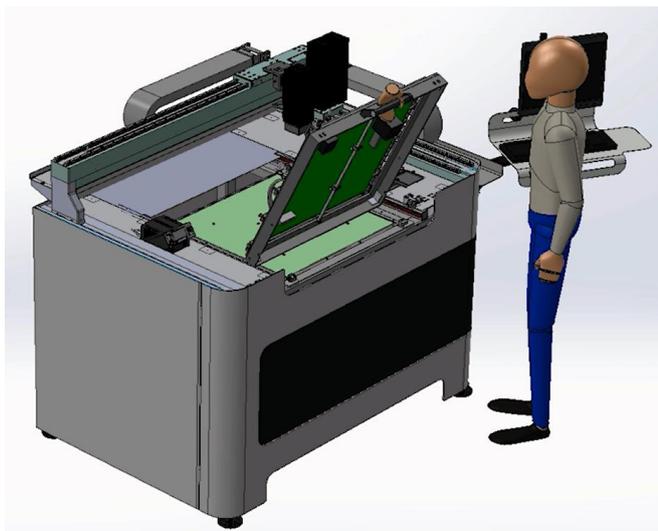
rework system with Production Rework Equipment PCB holder and bottom support
